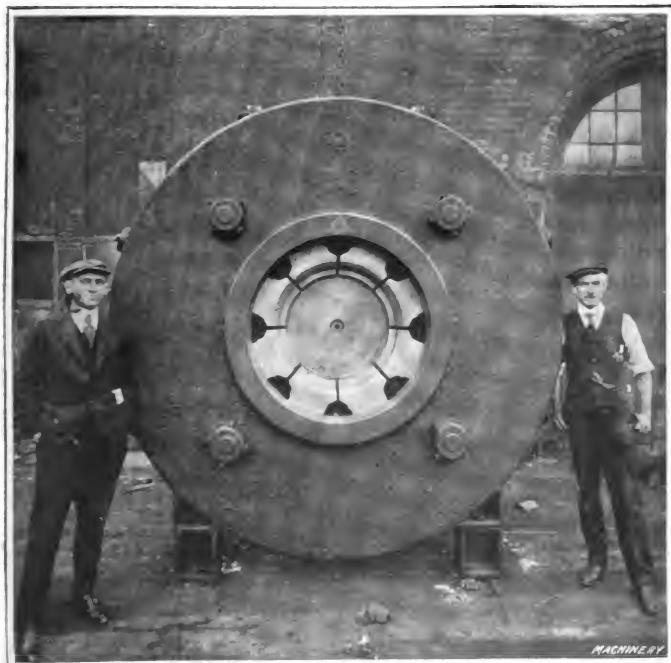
Front view of Metalwood hydro-mechanical rim shrinker
